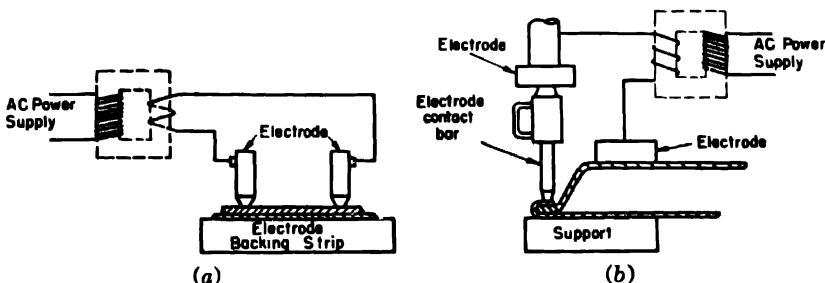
Special methods of spot welding. (a) Multiple welding. (b) Welding without surface marking.
